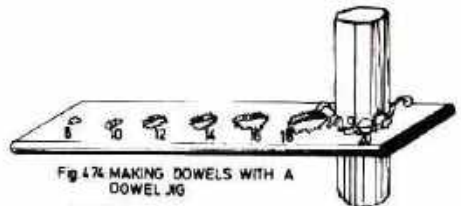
MAKING DOWELS WITH A DOWEL JIG
